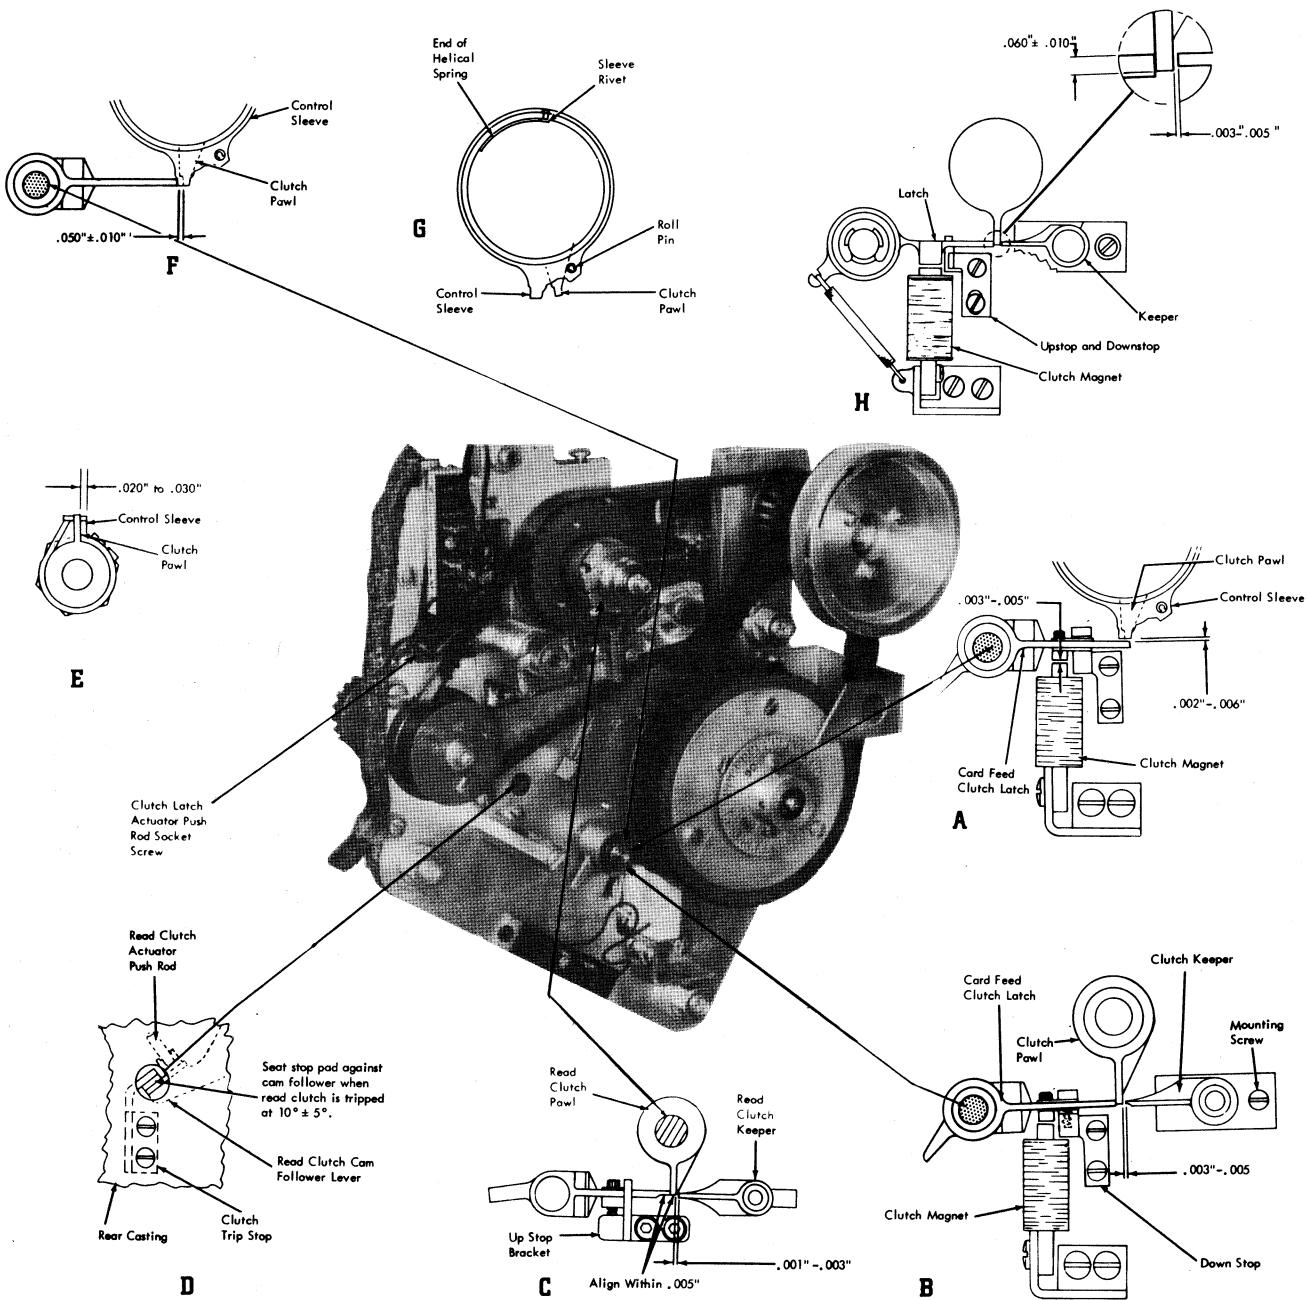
Card Feed Clutch and Read Clutch Adjustments
